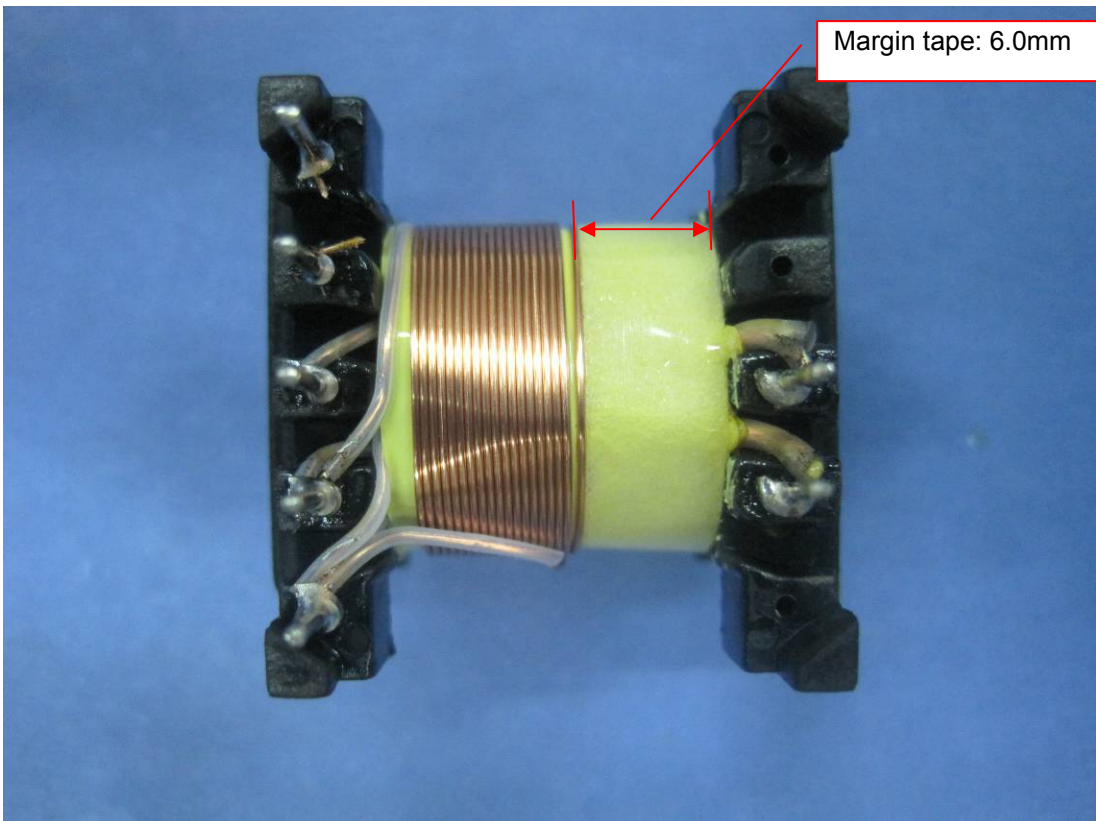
Transformer T1 on power board (model: G0682) overview (4)
